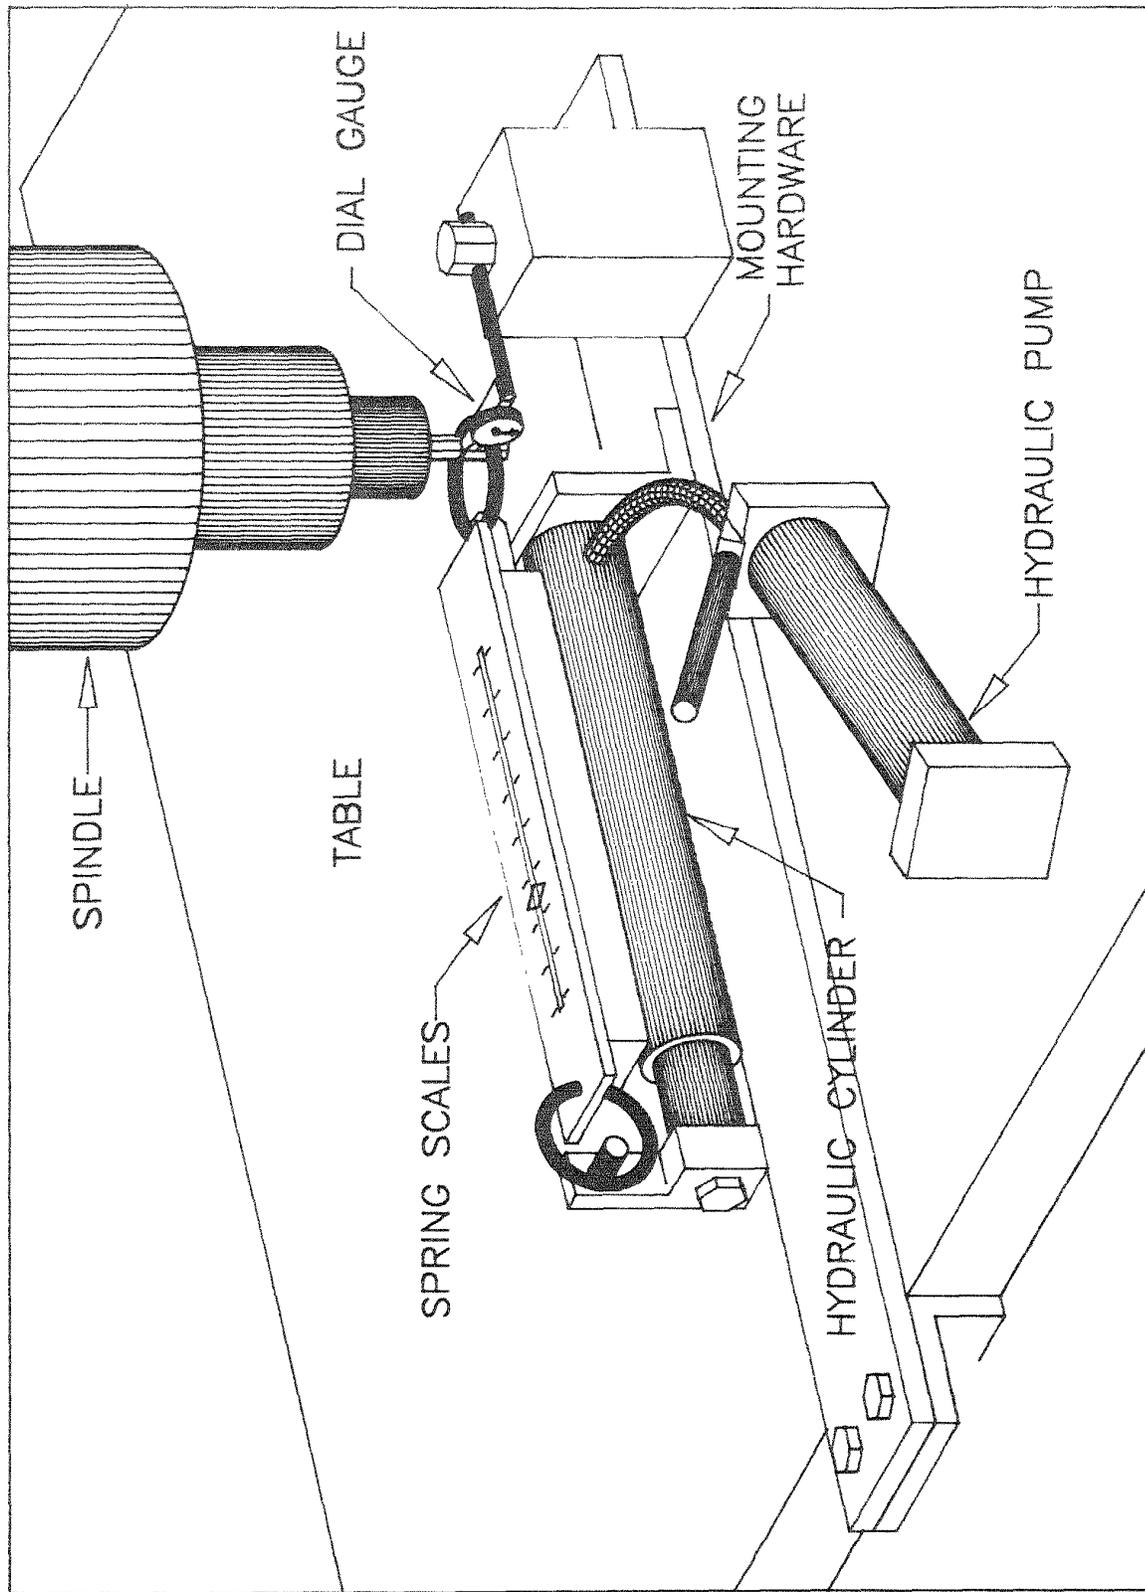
Equipment setup for measuring tool/table deflections resulting from cutting side pressures.
